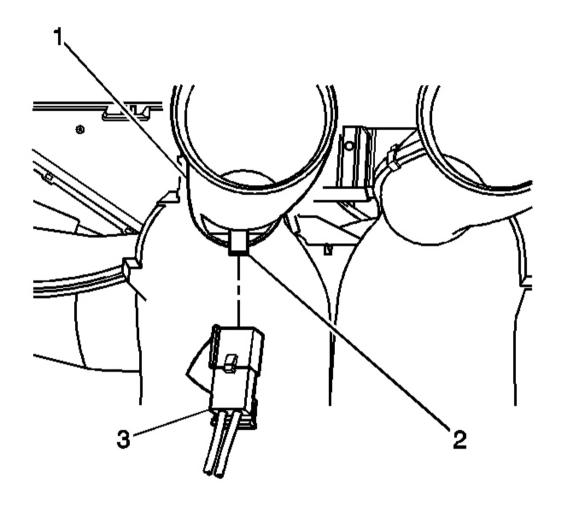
Upper Left Air Temperature Sensor & Air Distributor Duct Courtesy of GENERAL MOTORS CORP.
